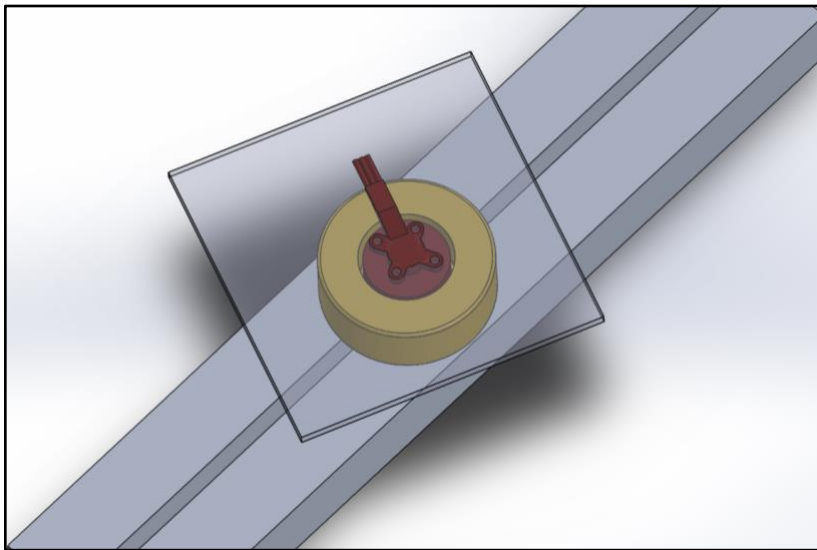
MOTOR SHAFT INSERTED INTO THE DISK BORE
